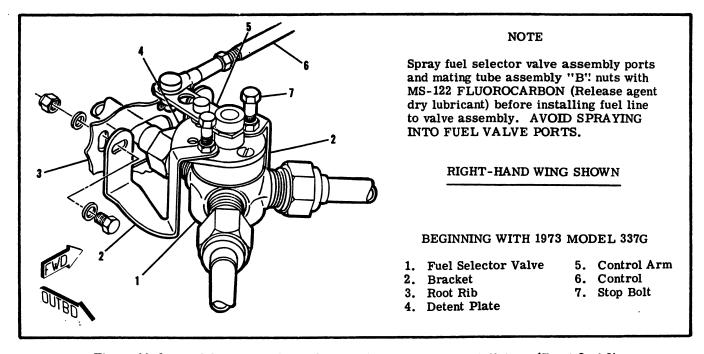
Fuel Selector Valve and Fuel Selector Gearbox Installation (Sheet 2 of 2)
